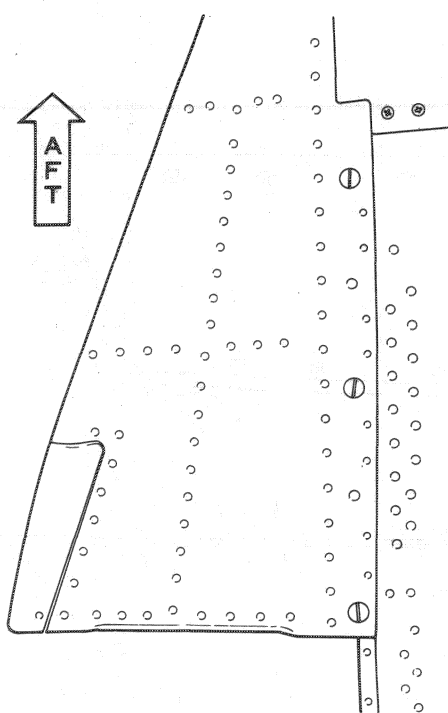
Engine Access Door Opening (Sheet 1 of 7)
